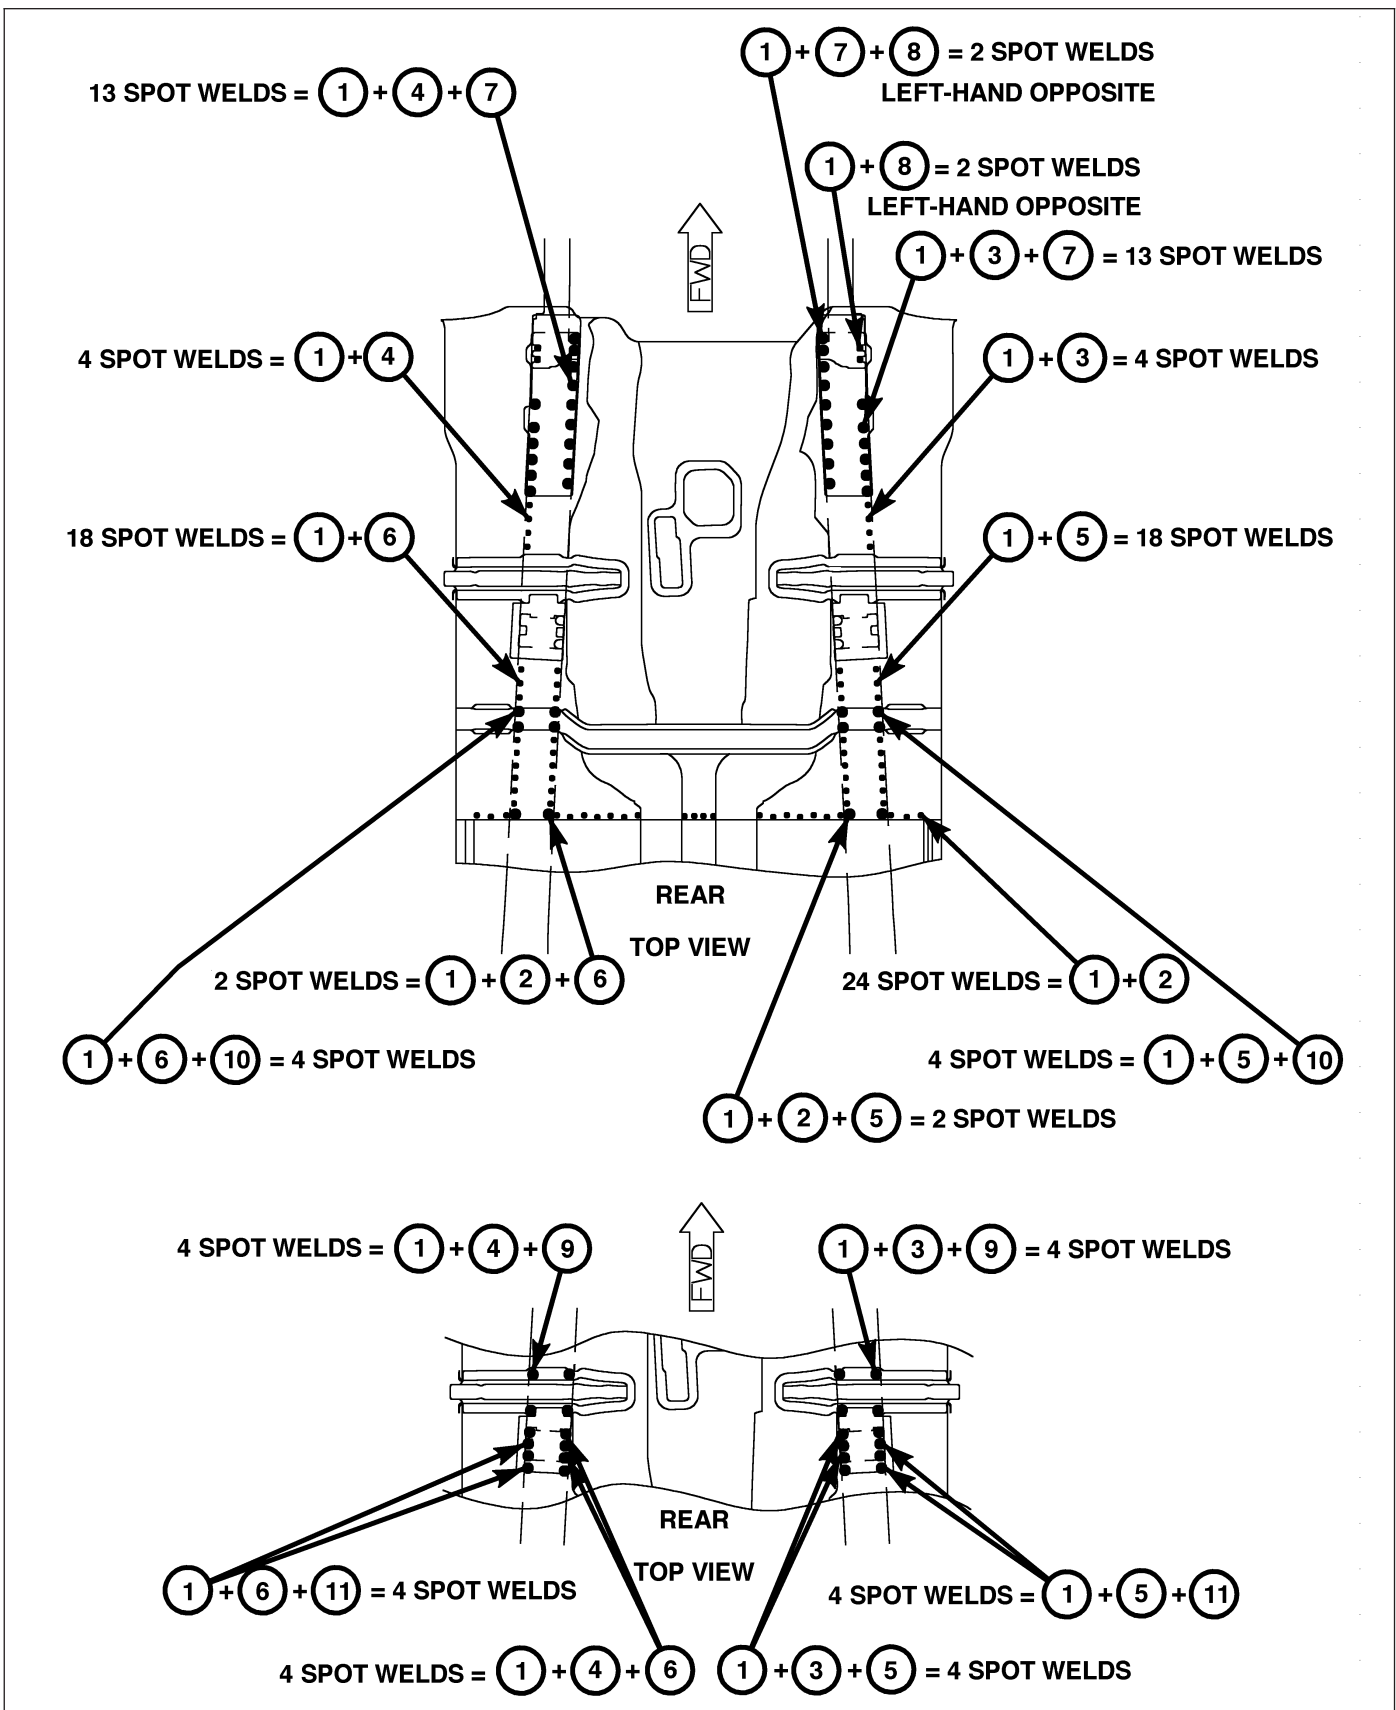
FLOOR PAN AND RAIL ASSEMBLY WELD LOCATIONS
